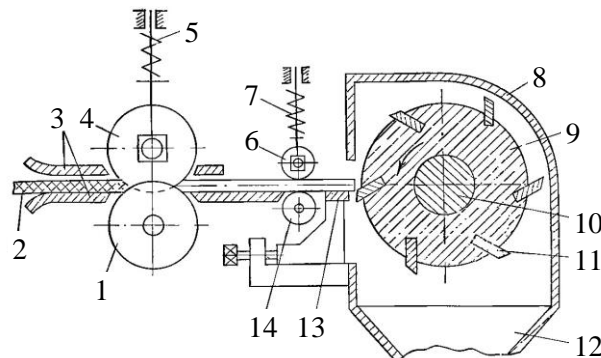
Scheme of a shredder with disc knives and a rotating rotor for breaking sheet material into particles in the form of a parallelepiped of certain sizes [13]: 1, 4 – disc knives for longitudinal cutting of sheet waste; 2 – sheet waste; 3 – guide; 5, 7 – compression springs; 6, 14 – pulling rollers; 8 – casing; 9 – knife rotor; 10 – rotor shaft; 11 – rotor knives; 12 – unloading branch pipe; 13 – stationary knife
